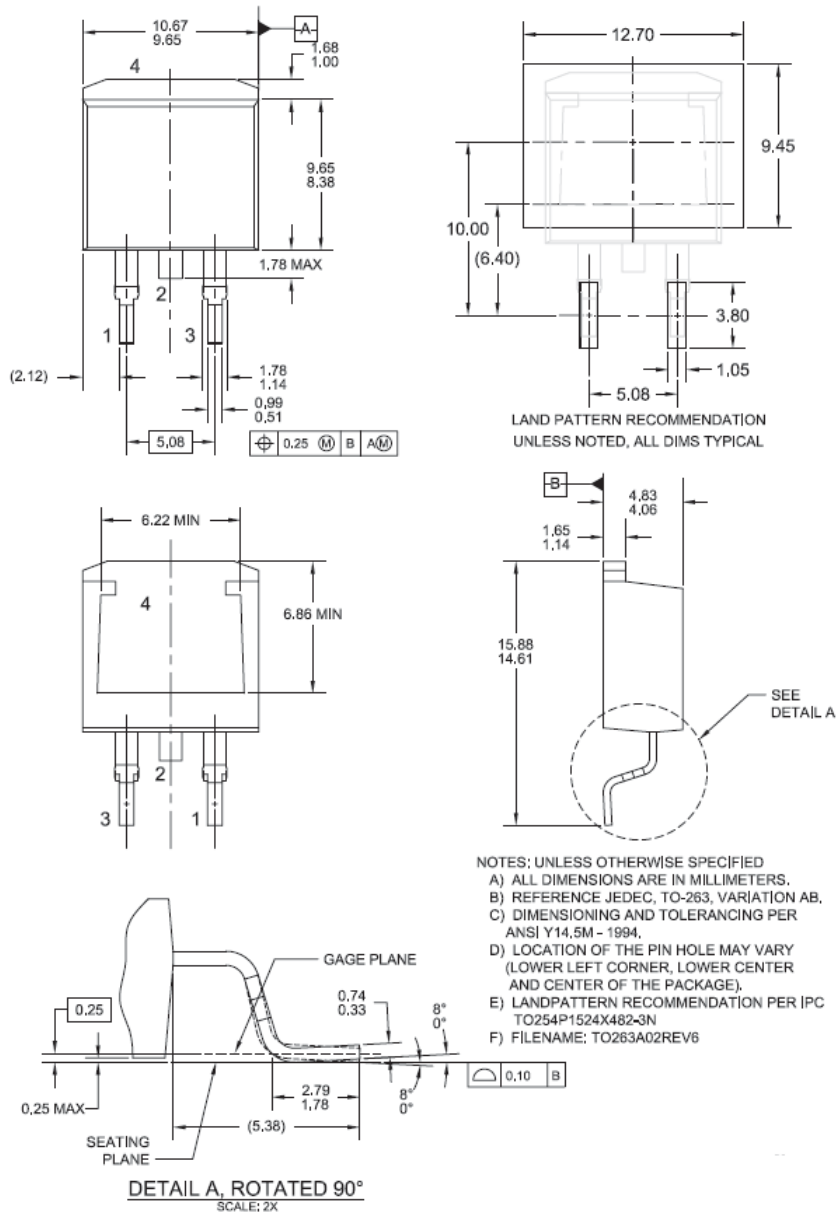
TO263 (D²PAK), Molded, 2-Lead, Surface Mount
